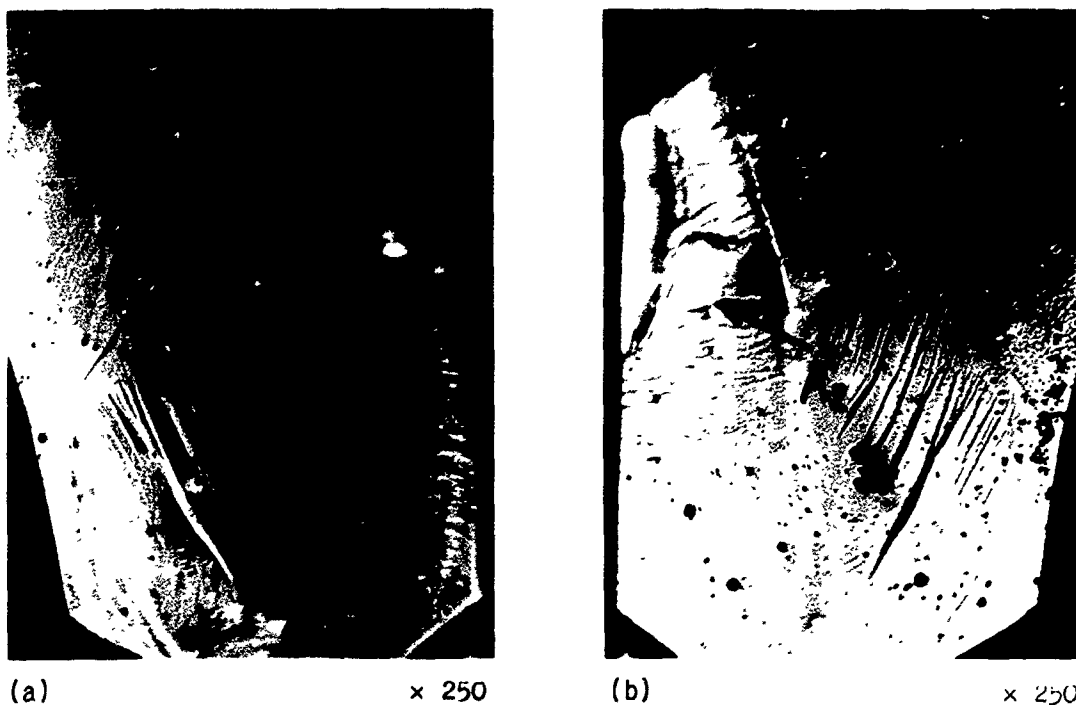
TWO MATING FRACTURE SURFACES SHOWING MARKINGS TYPICAL OF FAST CRACK GROWTH IN THE TERMINAL STAGE OF FATIGUE FRACTURE.
